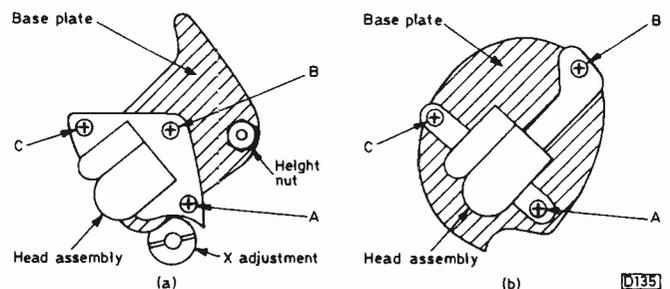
Typical audio/control head assembly layouts, (a) with height adjusting nut, e.g. Hitachi models, (b) without height adjusting nut, e.g. Ferguson 3V22.
